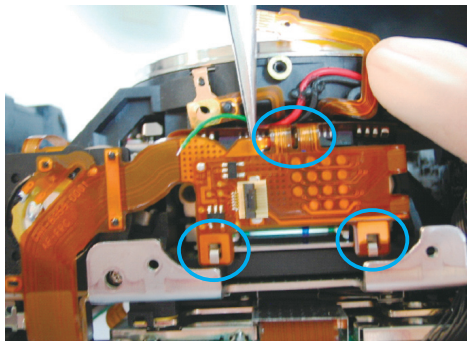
Auto Focus FPC Ass'y Assembly 3
